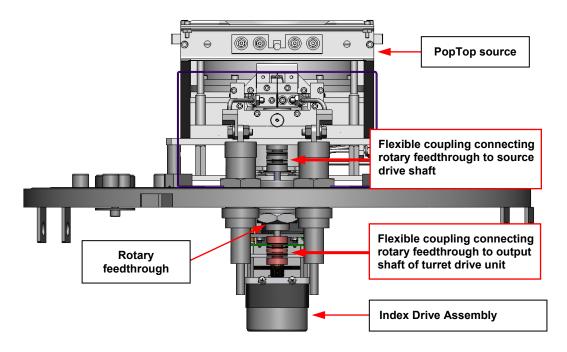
Parts Included in PT Gun Mechanical Installation Kits
